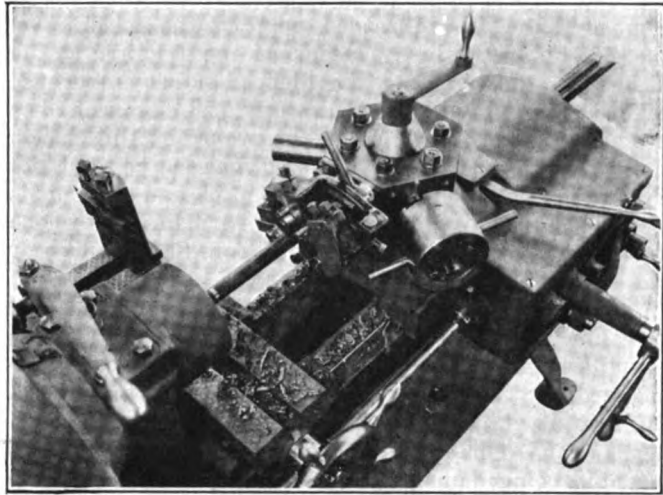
BOX MILL IN POSITION ON MODEL A LASSITER-MILLHOLLAND STAYBOLT MACHINE
